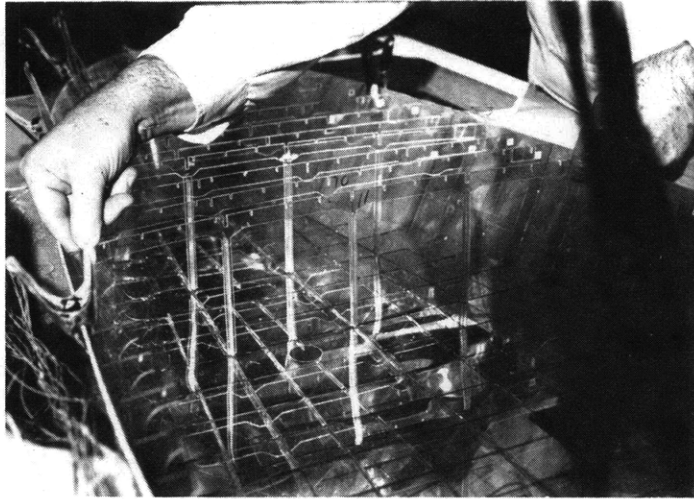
Transverse 0-1 Level Deck Framing and Stanchion Installation
